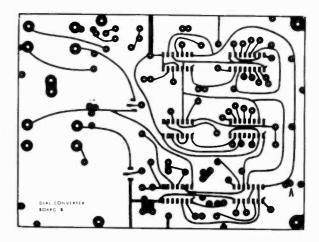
(left)—PRINTED CIR-CUIT pattern for Board-A shown half-size.
